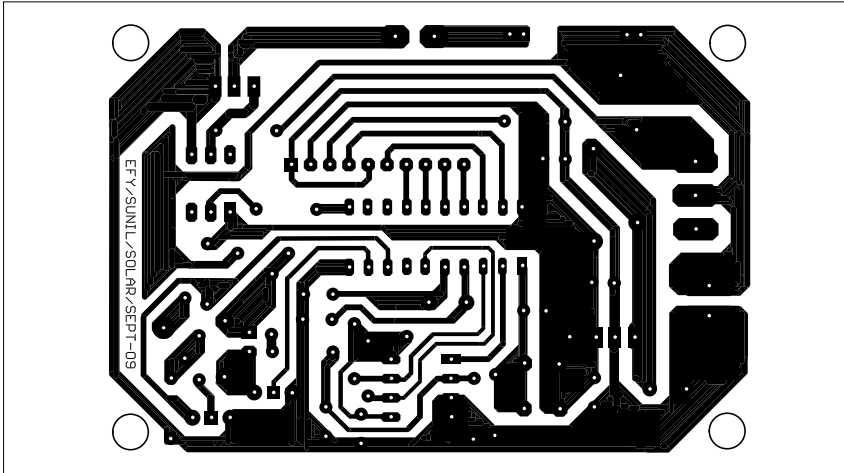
A single-side, actual-size PCB layout for microcontroller-based solar charger
